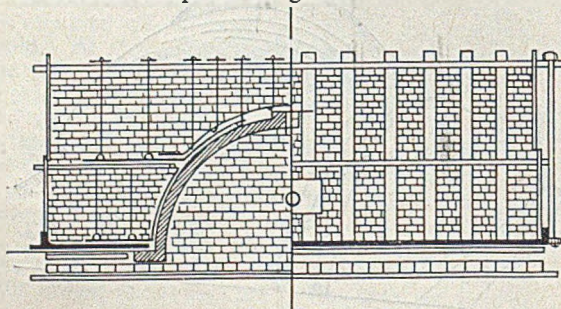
Half-section and Part Exterior of the Assembled Mould for the Volute Section.
